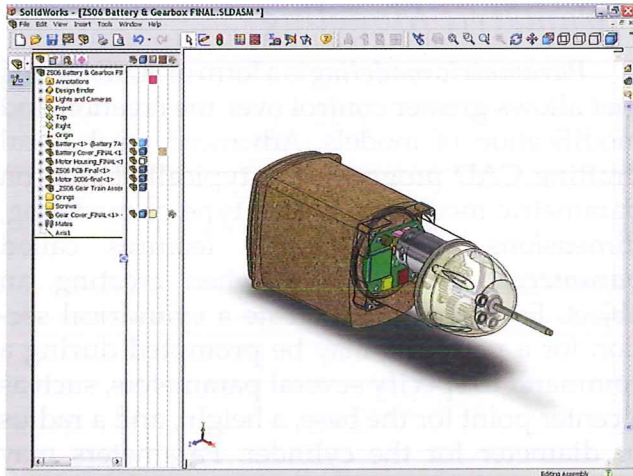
Parametric modeling programs provide advanced tools for creating mechanical parts such as this motor assembly. (Image Courtesy of SolidWorks Corporation)
